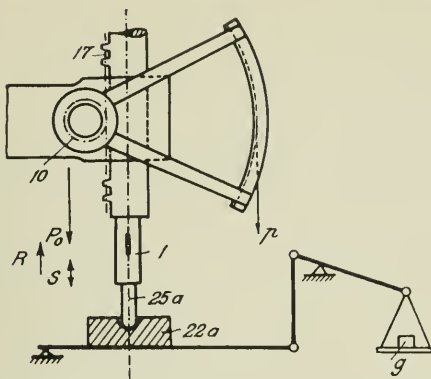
Determination of the actual Drill Pressure P with the Hardness Drilling Machines. Patterns I. and II.
